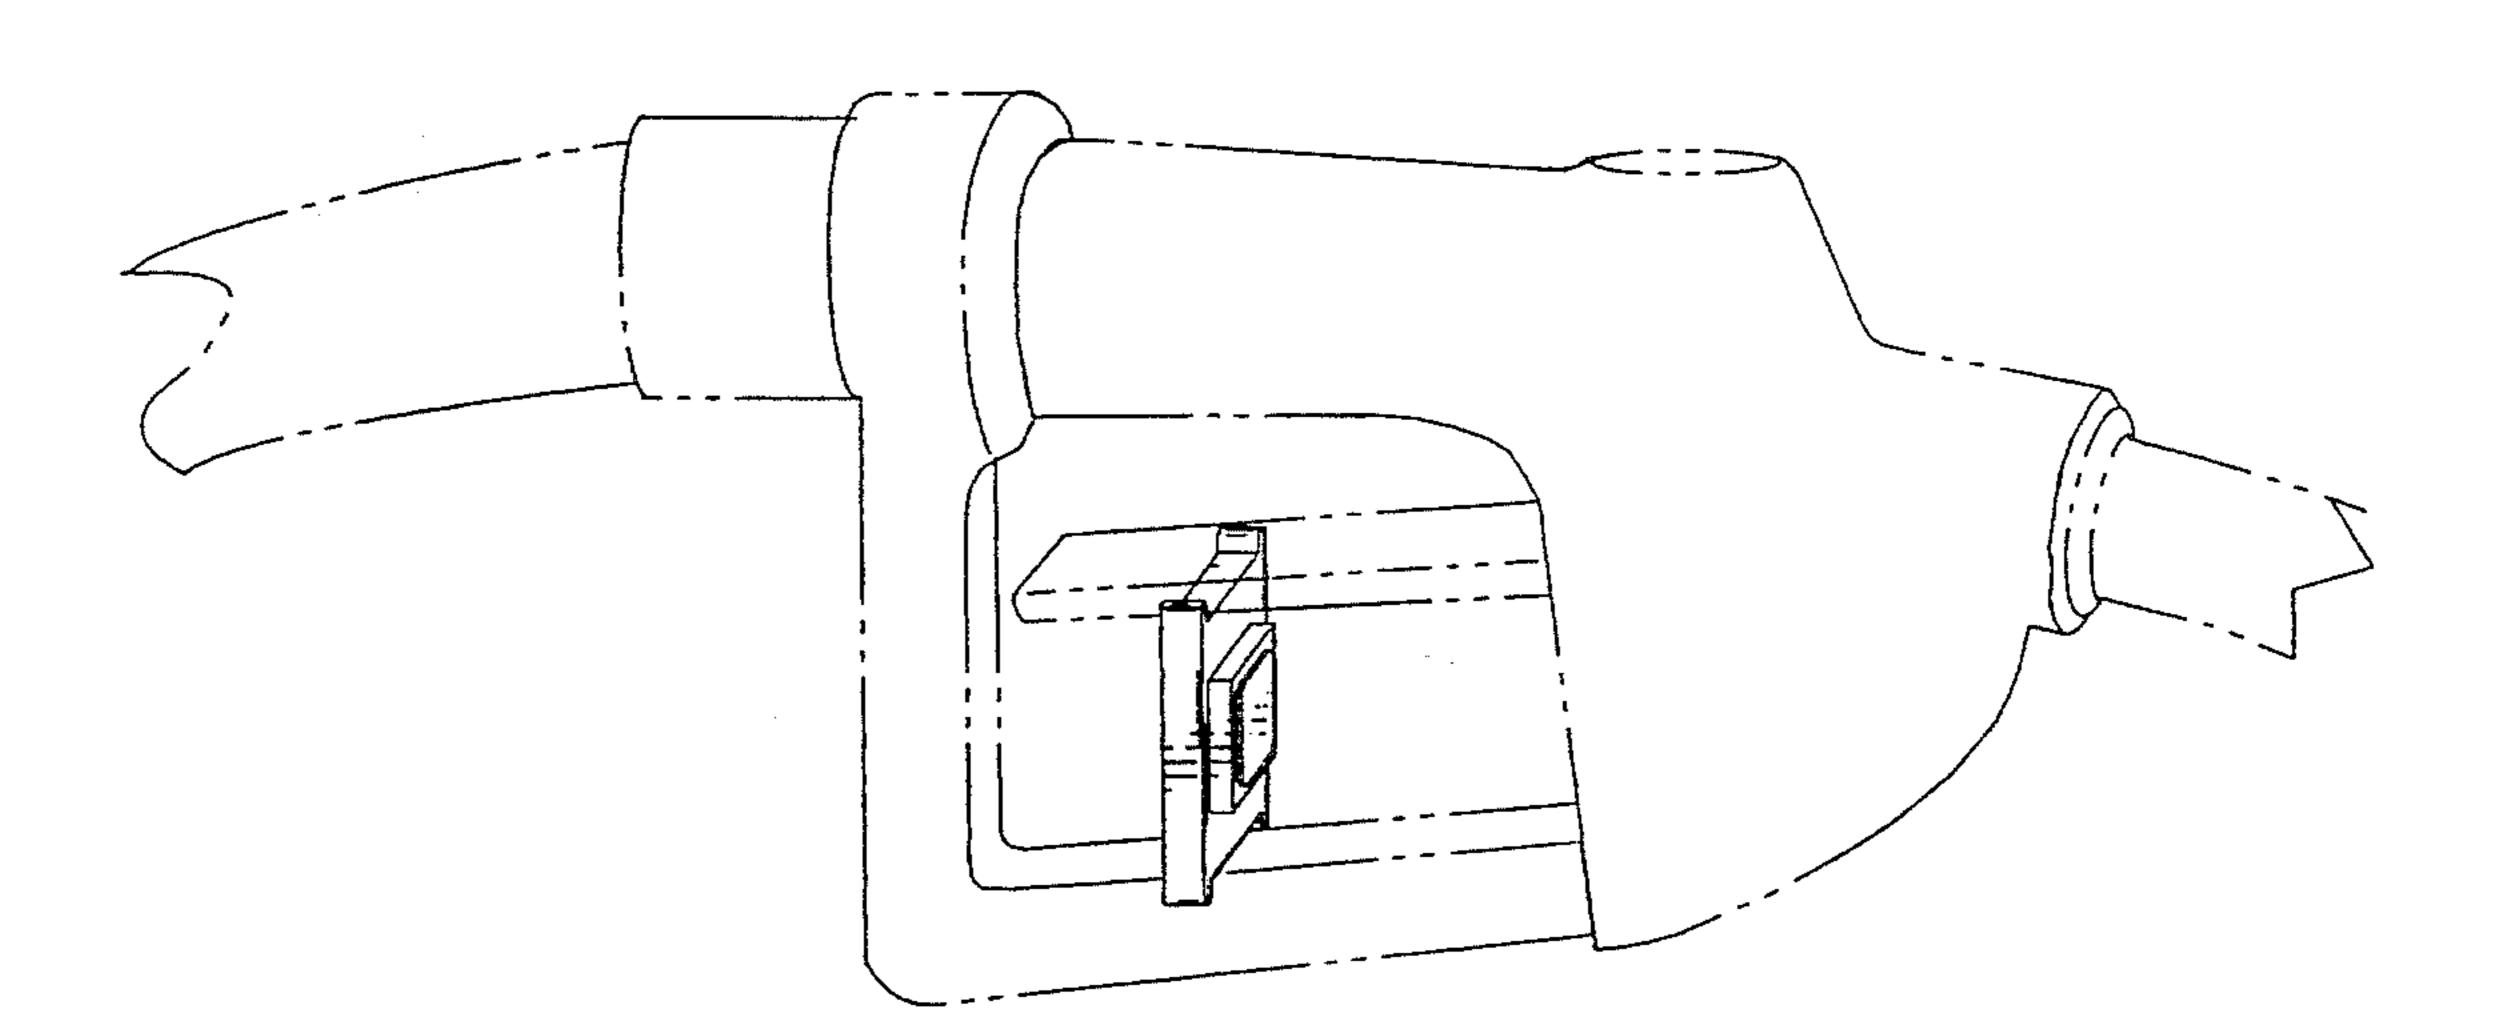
is left elevational view thereof, the side opposite being a mirror image;
